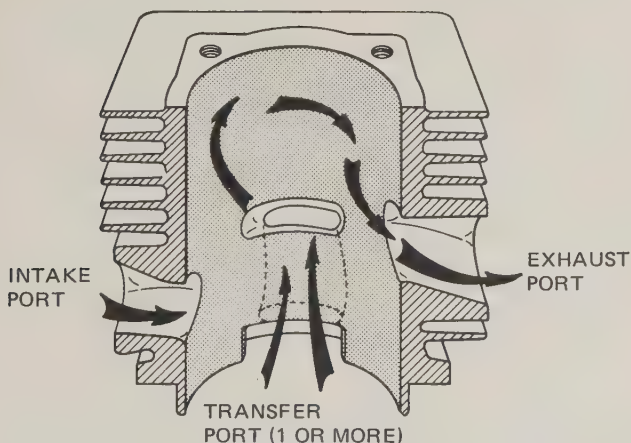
Cutaway views of a cylinder showing the ports in a two-cycle engine. (Kohler Company)
